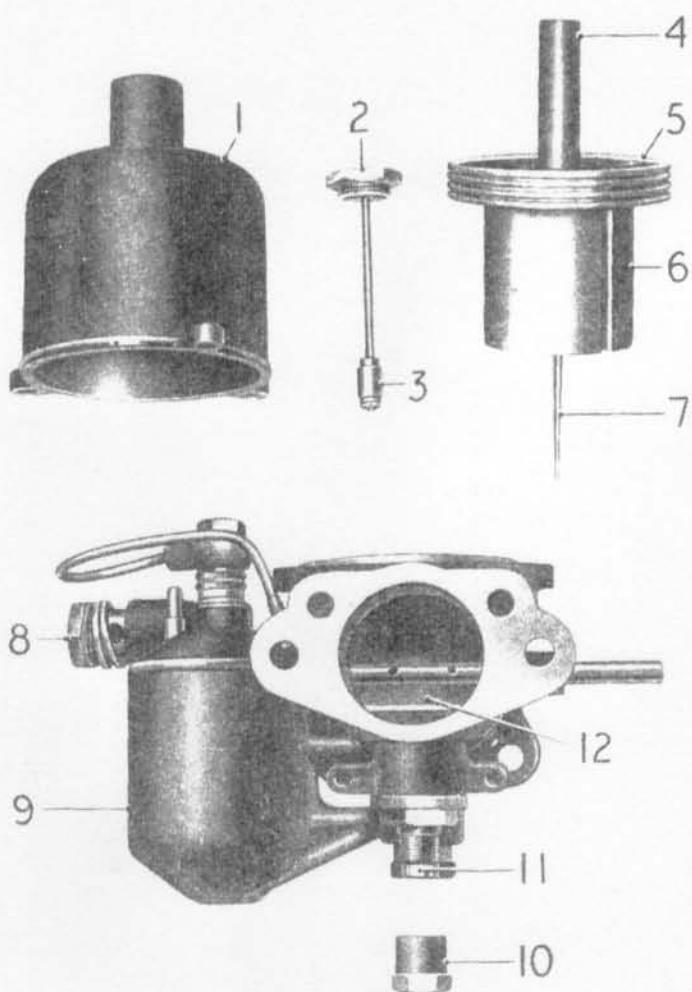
CARBURETTOR - EXPLODED VIEW.
